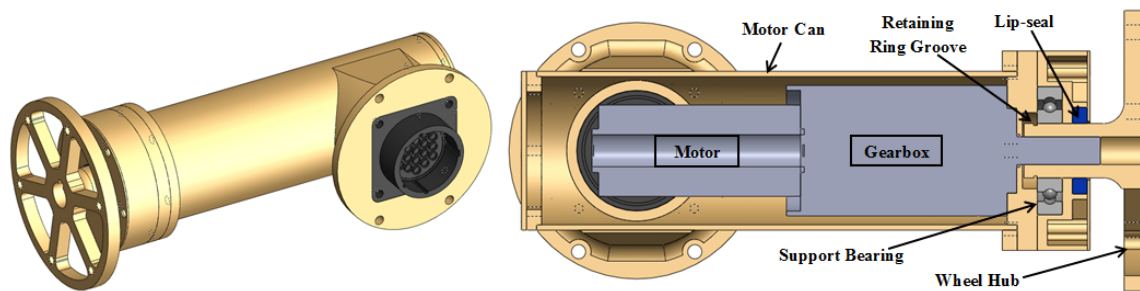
Design of Drive Motor Module: Whole View (left) Section View (right)
